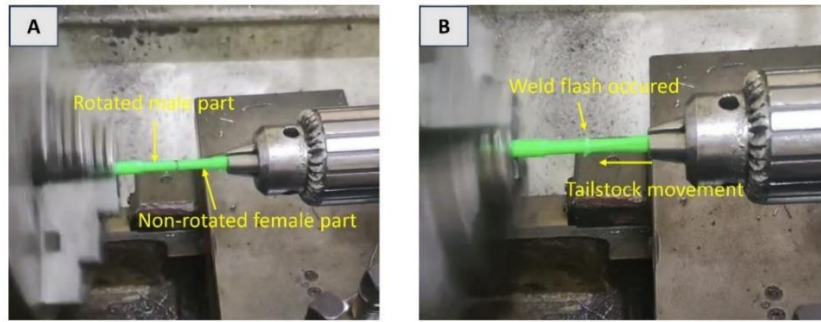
RFW process using a lathe: (A) initiation of the process, and (B) tailstock movement during welding
